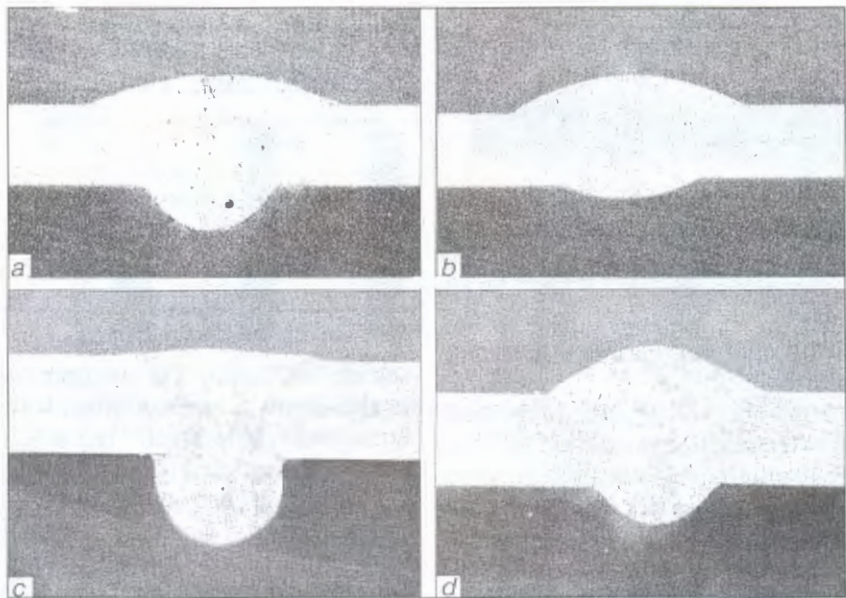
Macrosections of welded joints of AlMg4.5Mn alloy of 2 (*a, b*) and 4 (*c, d*) mm thickness made by a conventional technology (*a, c*) and with use of cleaning and forming fluxes (*b, d*)
